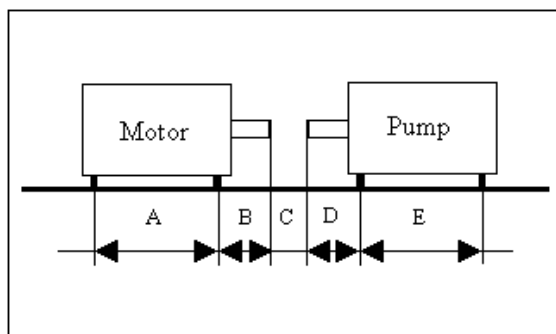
Schematic view of the pump-motor assembly with marked measurements for mathematical solution.
